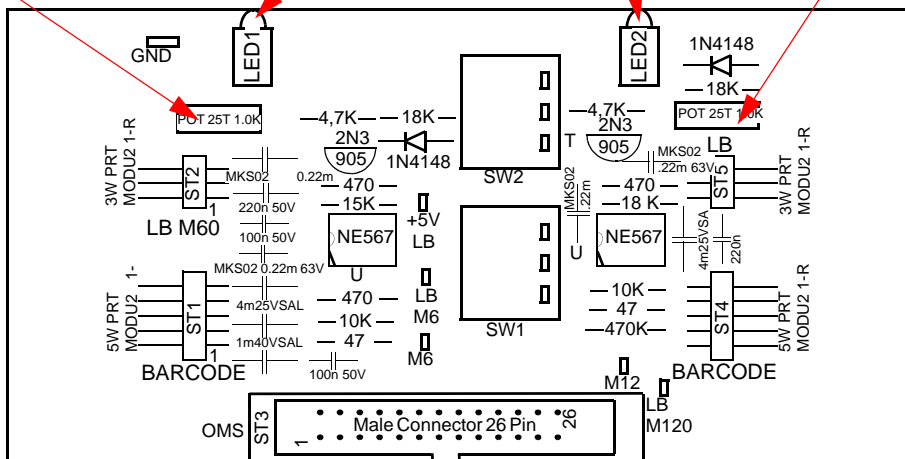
Barcode Adapter Board Component Layout B-ACS 120
